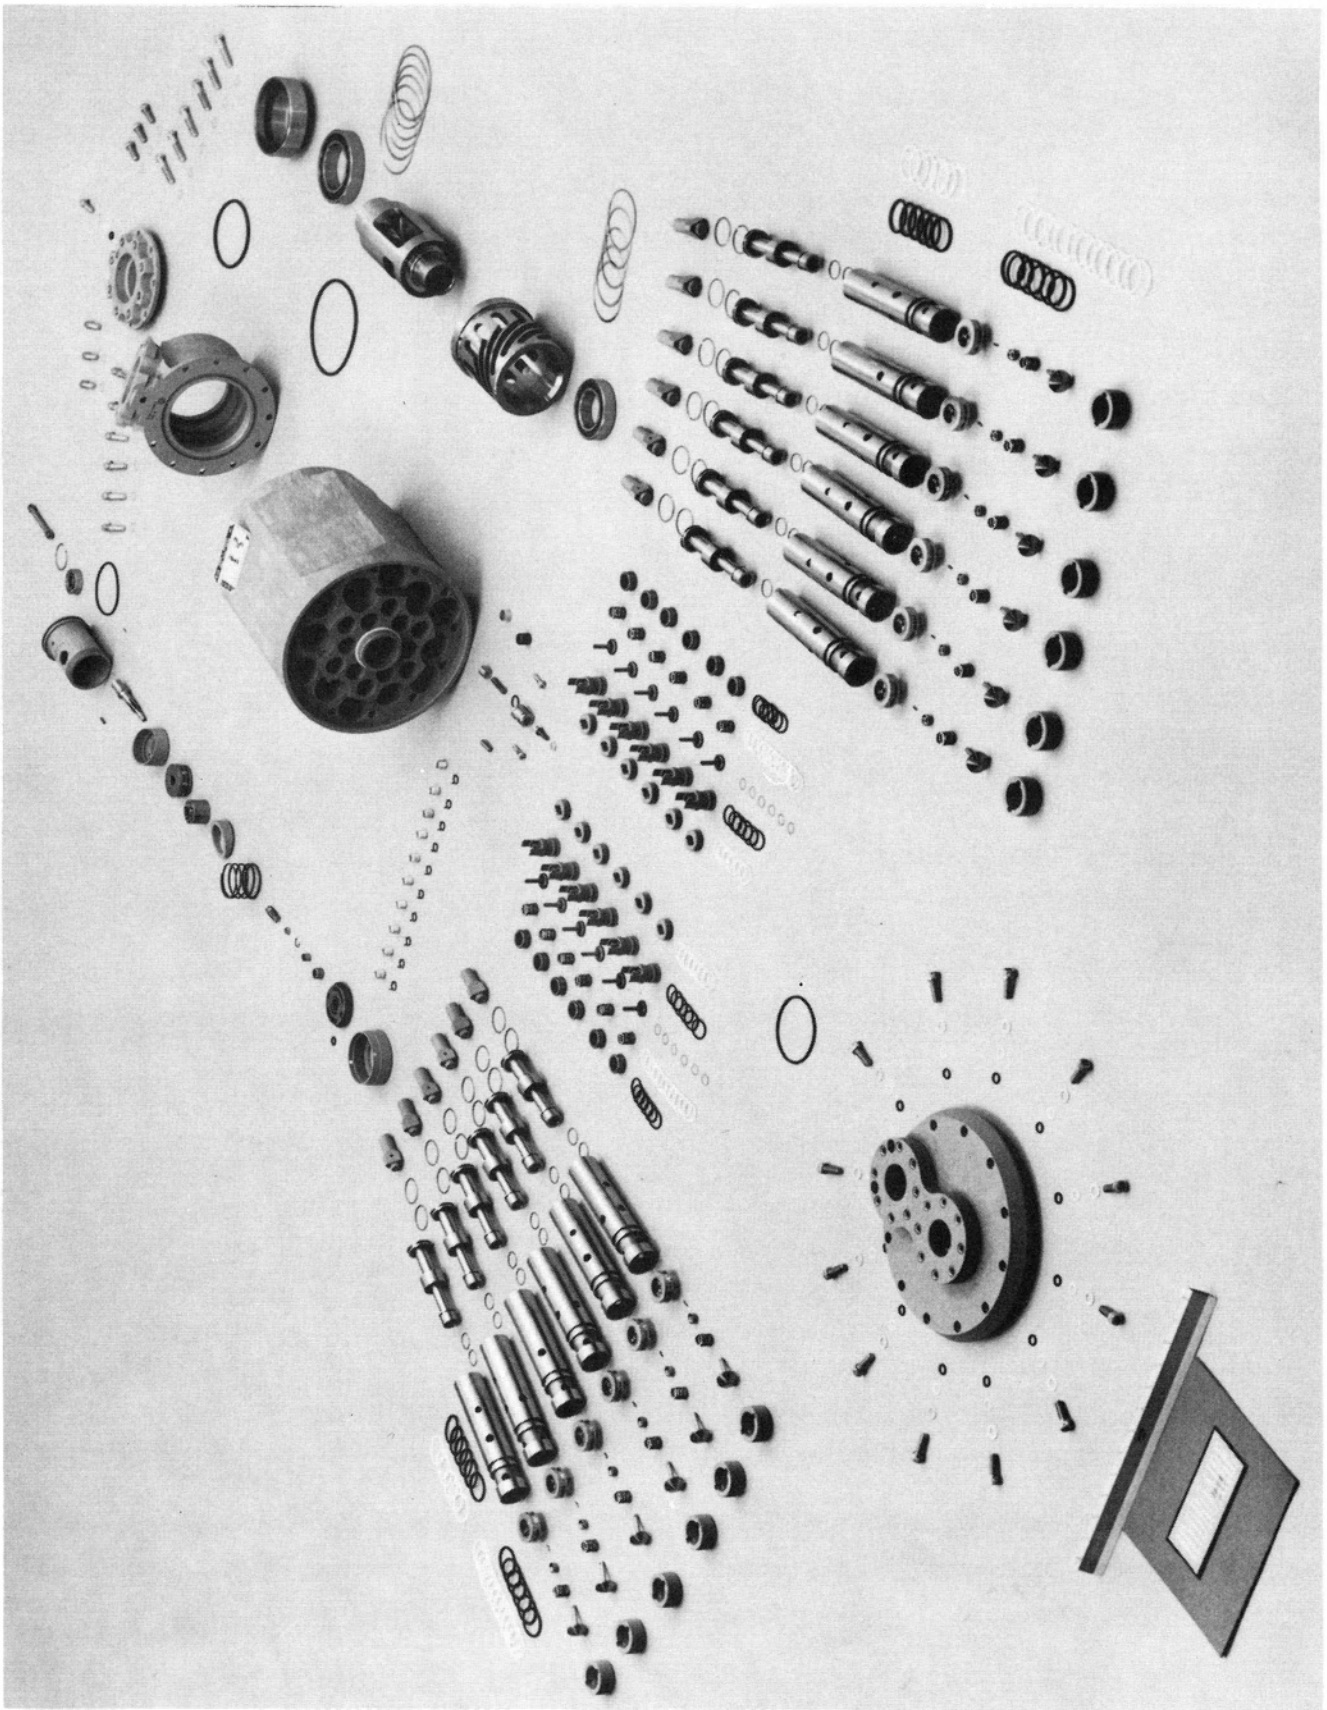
PARTS ARRAY OF HYDRAULIC TRANSFORMER
